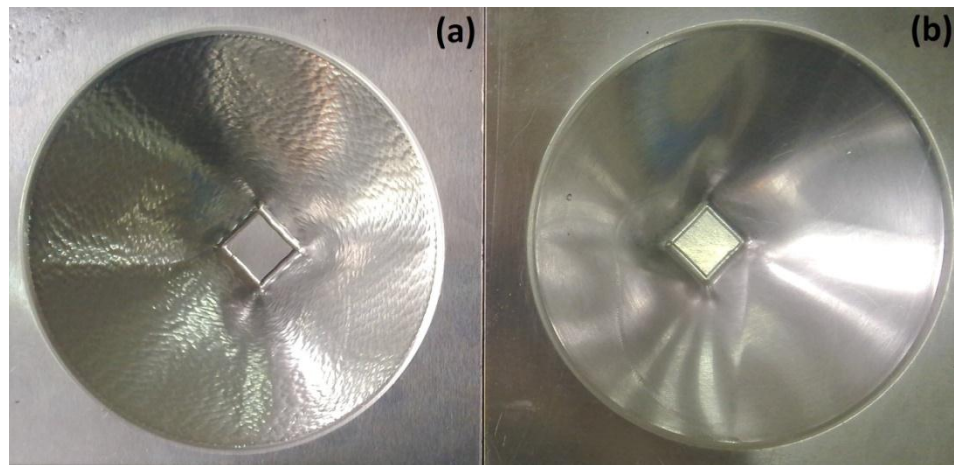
(a) Part formed by an inaccurately made tool and spindle speed (SS) of 500 rpm; (b) part formed by the same tool that is fully constrained from rotation (SS=0).
